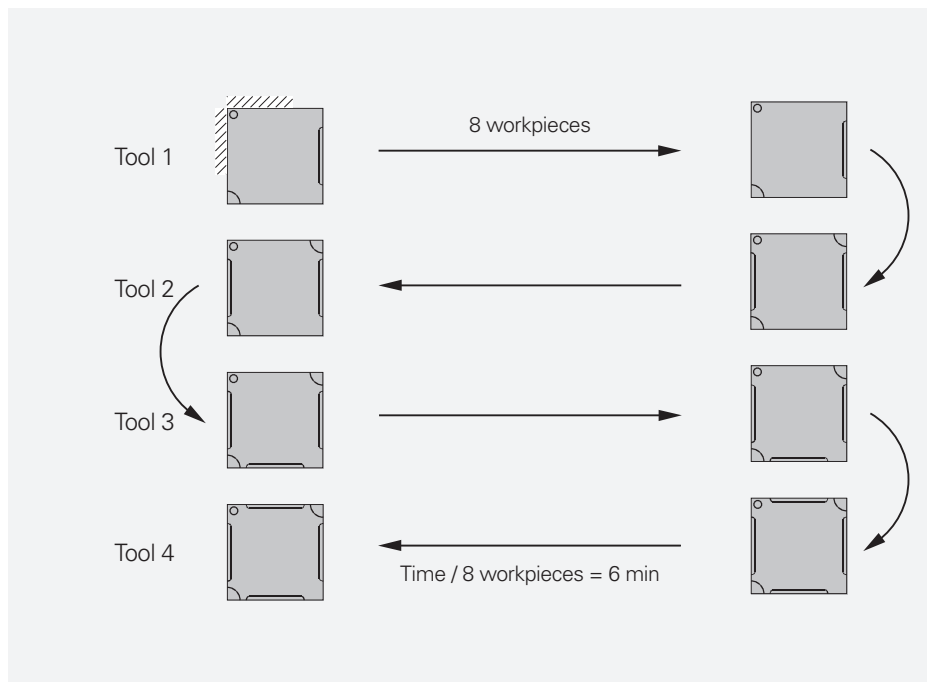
Experimental setup for batch production with multiple workpieces. Four pockets and two radii were machined using four tools to a depth of 1 mm each. To illustrate drift resulting from thermal expansion of the ball screw, the workpieces were not exchanged after machining. Instead, the part program was run repeatedly at successively increasing depth.
